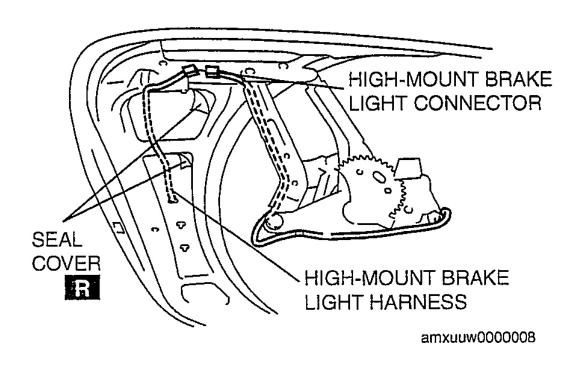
Identifying High Mount Brake Light Connector And Harness Courtesy of MAZDA MOTORS CORP.
